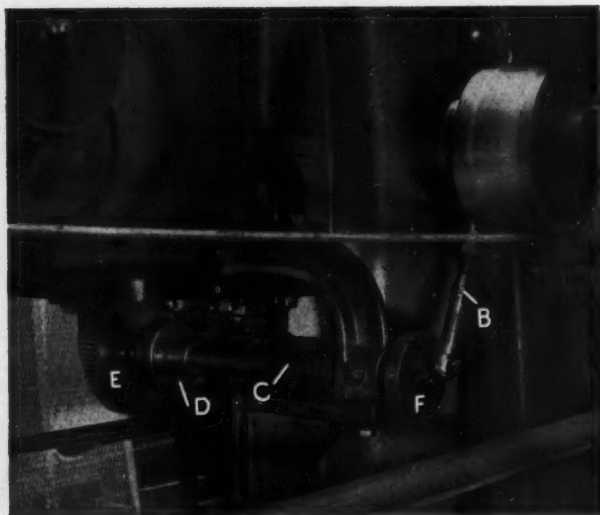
The drive arrangements for a shuttle-type feed unit for delivering workpieces from the magazine to the press tool on a machine in the bank. The rod *B* is connected to a frame which is oscillated by an eccentric on the press crankshaft
